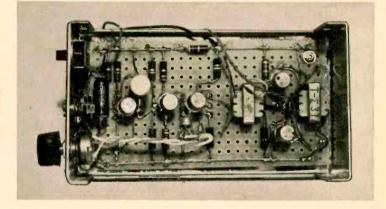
All parts fit on 21/2x5-inch perforated board. Heat-sink the transistor leads when soldering.
